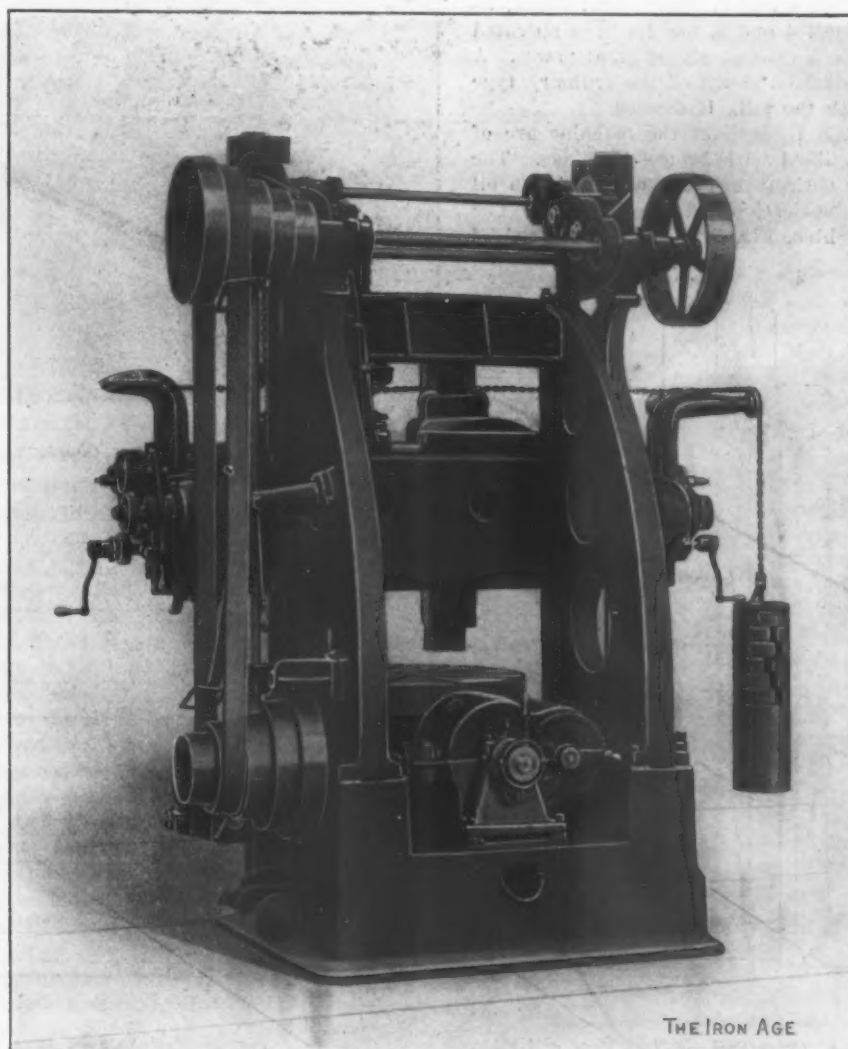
Rear View, Showing Motor Mounting and Driving Connections.
